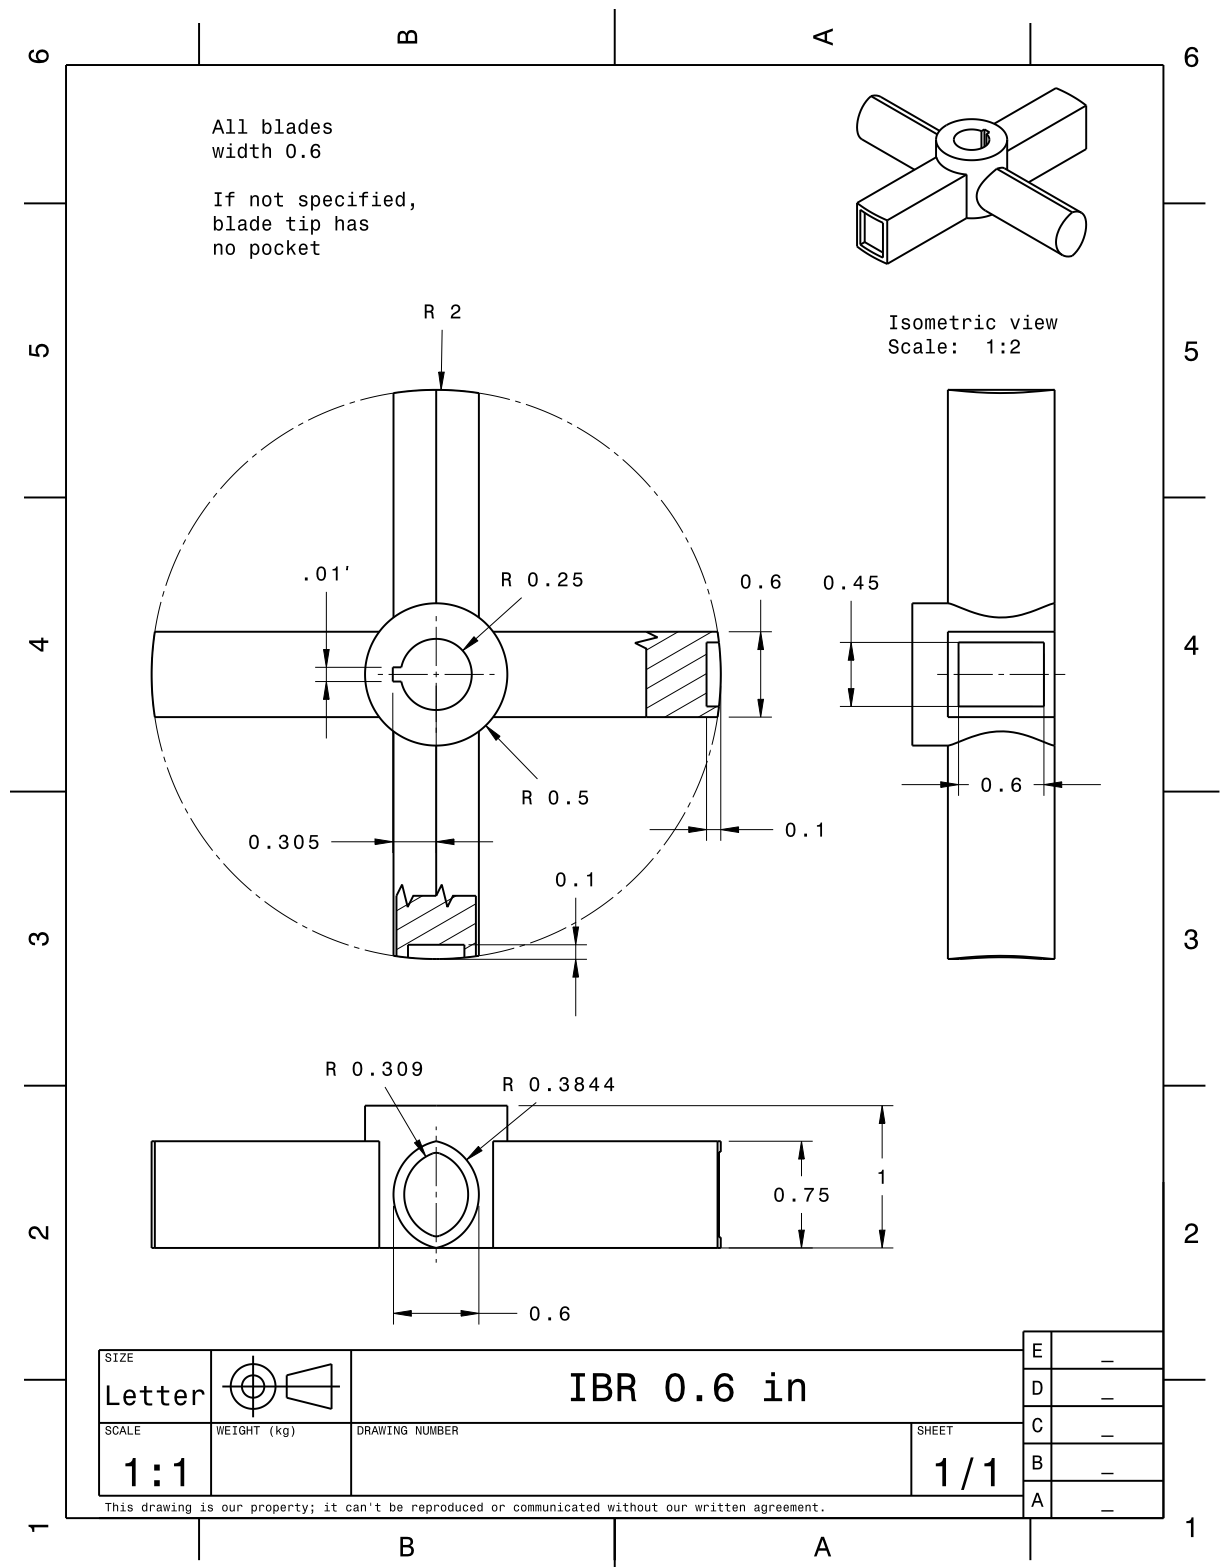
Technical drawing of IBR with blade width 0.6 in
